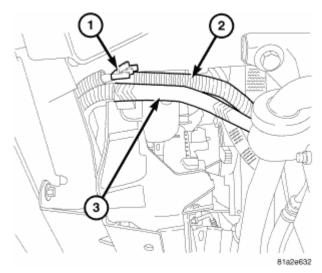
Identifying Return Hose Assembly & Routing Clip Courtesy of CHRYSLER LLC
